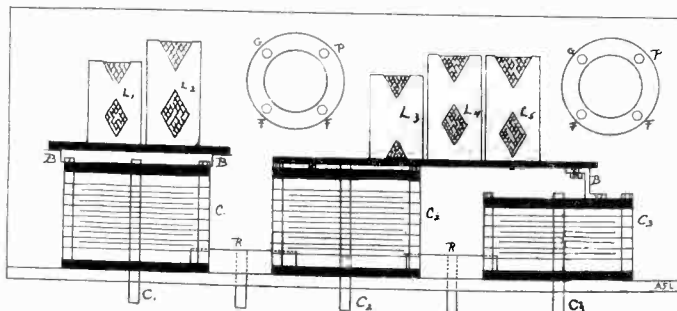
Layout assembly of the three-control set. The honeycomb coils are mounted on a bakelite strip bolted to the back of the variable condensers. It might be advisable to employ regular coil mounting so as to make possible different combinations of coils. They should be non-adjustable. If the coils are desired to remain in the set permanently, they should be tied together with a piece of twine, doughnut fashion, and then tied firmly to the bakelite strips.
